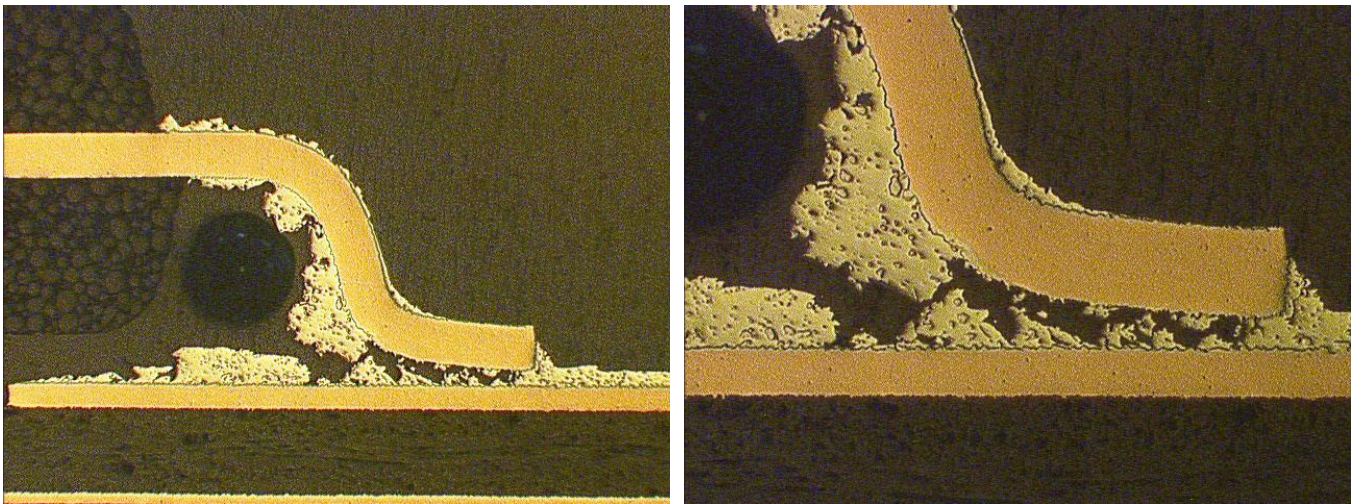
TQFP-144 Solder Joints, Board 103, Component U48, SN100C/Sn, Failed @ 1712 Cycles
